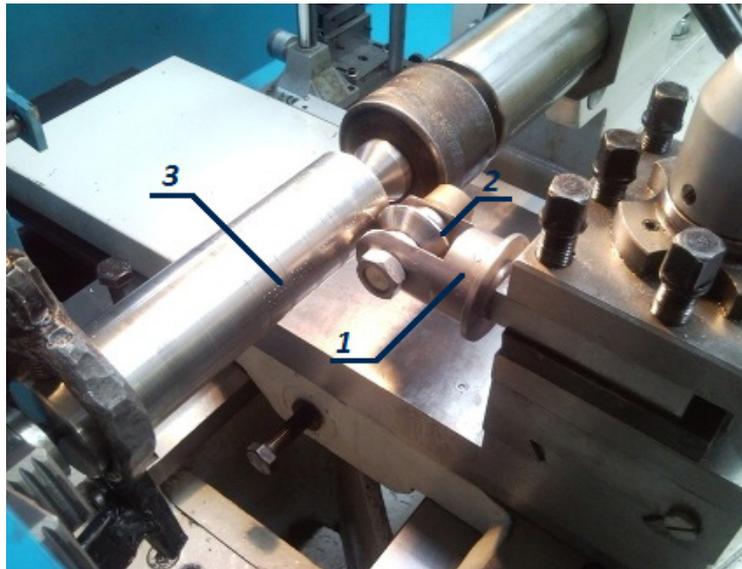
The schema of burnishing rolling – pressuring process (BRP), 1 – burnished roller (BR-01), 2 – disk burnishing tool, 3 – outer cylindrical surfaces
